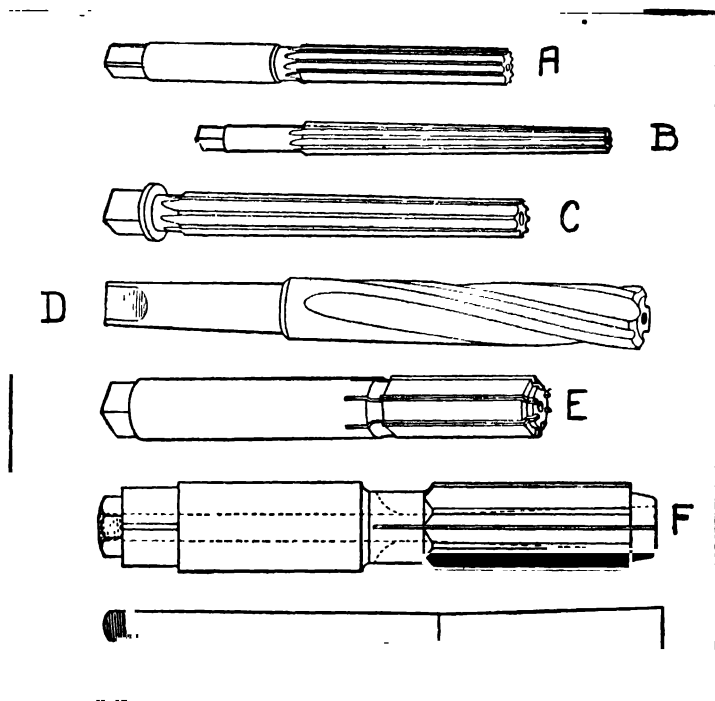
Standard Forms of Hand and Machine Reamers.
